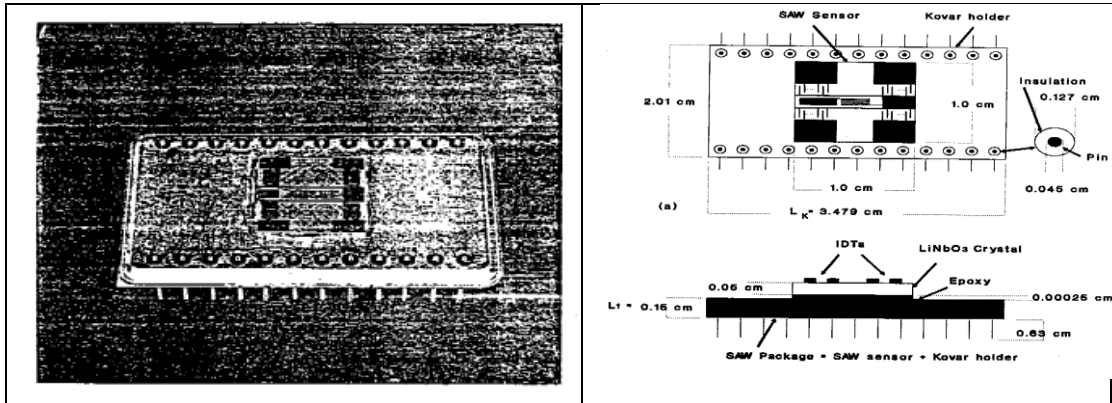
Photograph of the actual SAW package used to carry out experiments.
